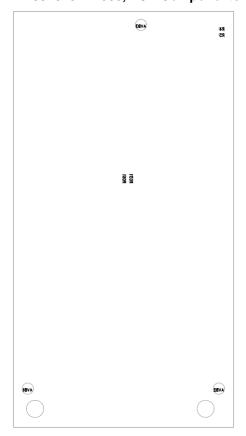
EM430F5137RF900, PCB Components Bottom Layer
